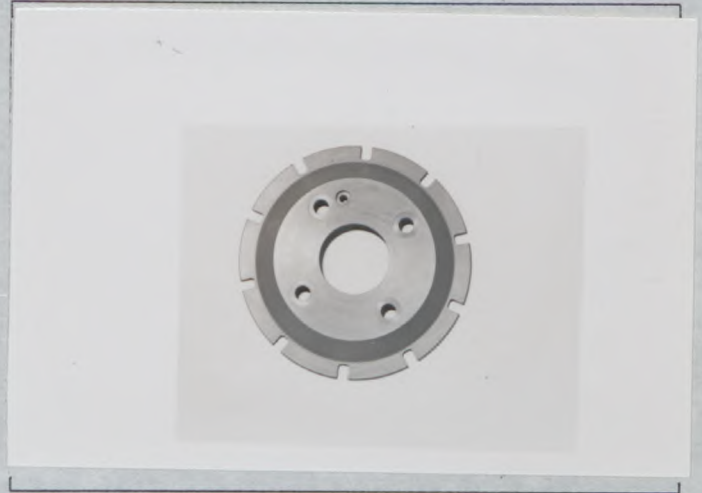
FRONT AND/OR REAR BRAKE DISC
